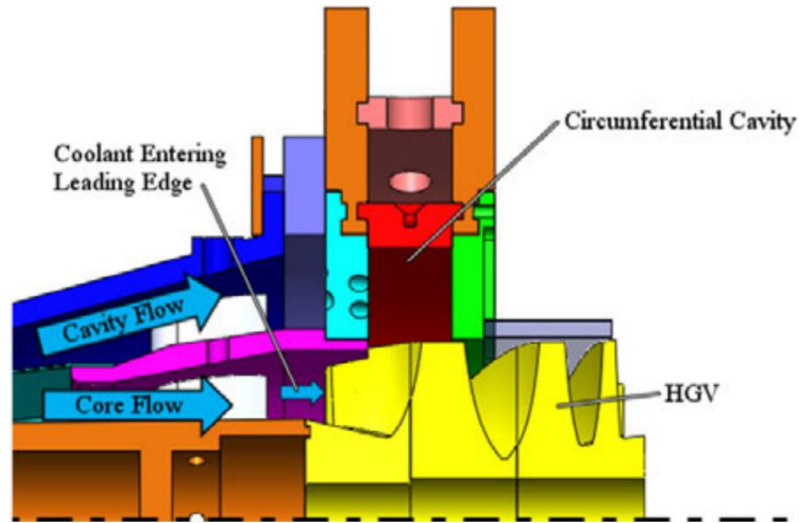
Cross section of AFIT's UCC detailing HGV leading edge location [5]
